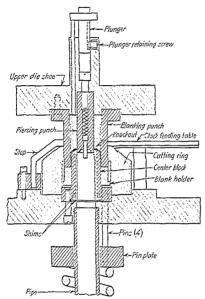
Die combining center piereing with blanking and drawing of thin stock. The stock is blanked and drawn to shape before the center punch cuts to swiid distortion of the fole.¹¹
